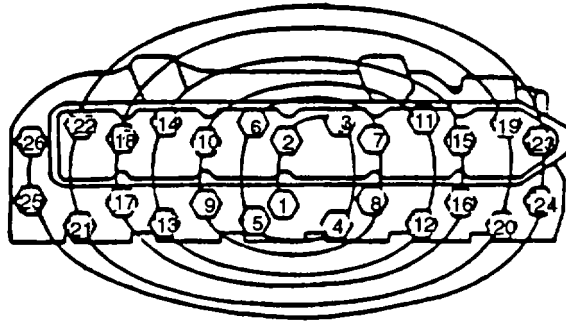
Cylinder Head Capscrew Tightening Sequence
